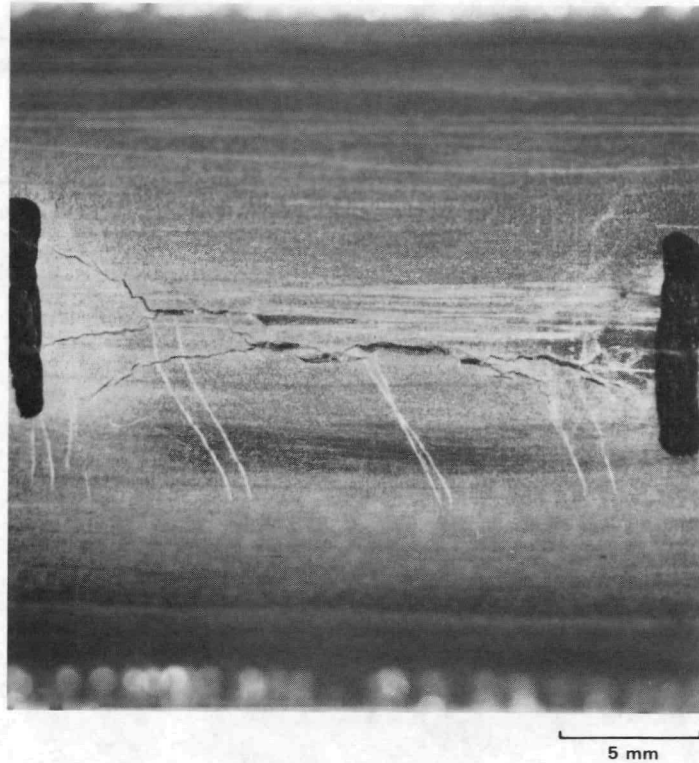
Photograph Showing ID Cracking of First TSP Specimen 1041 (R4 C51 HL) (26.9% strain)
